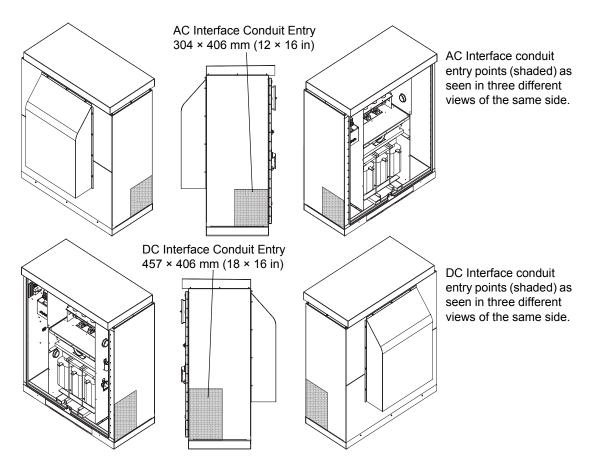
Conduit Entries Above Ground, Multiple Views
